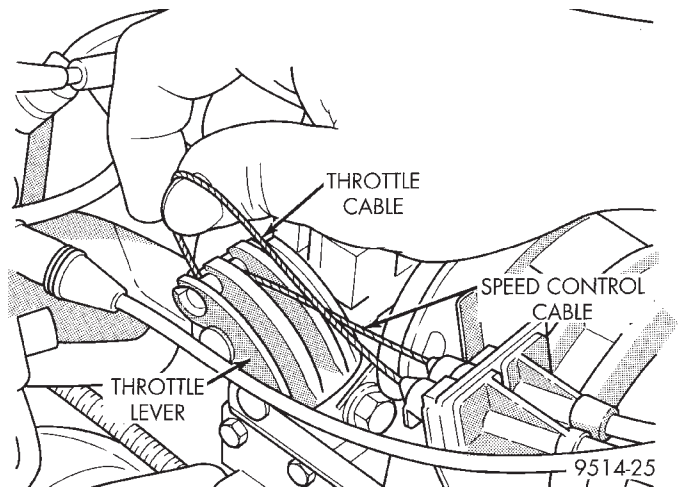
Throttle Cable Attachment to Throttle Body Attachment—3.3/3.8L Engines
